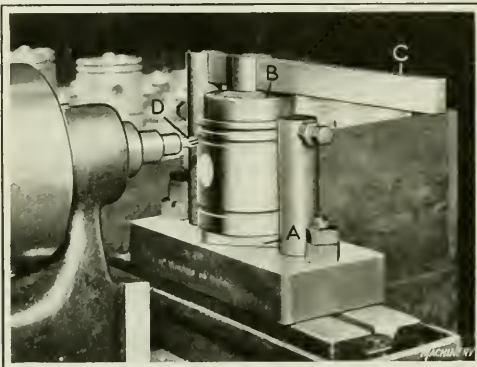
Hand Milling Machine equipped for chamfering the Lower Side of the Middle Piston-ring Groove
